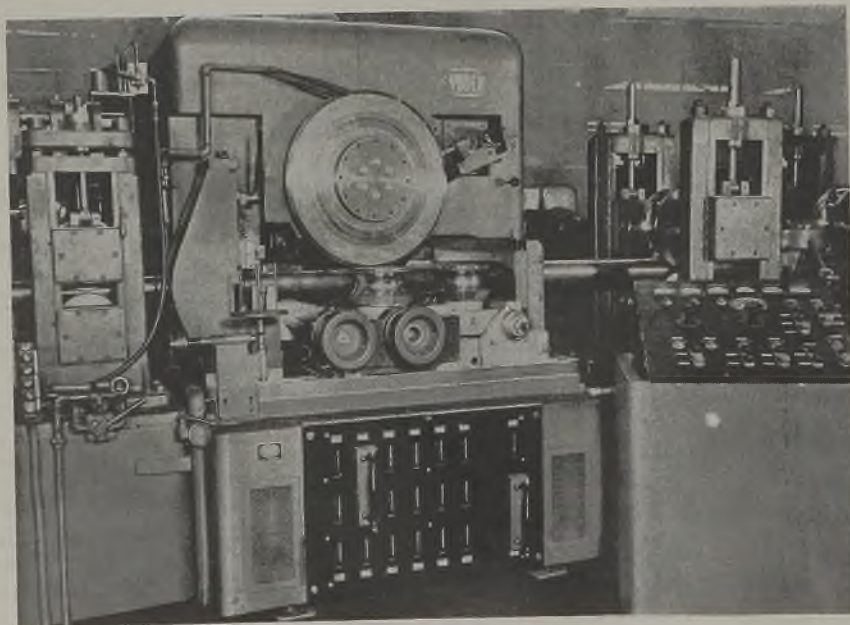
The heart of the machine is this resistance welding unit, with its twin wheel electrodes mounted directly on the transformer. Just below the nameplate is a device for dressing the electrodes by means of a turning tool. To the right is a centralized electrical control desk. Once the mill is rolling, the chief operator has full command from this station
